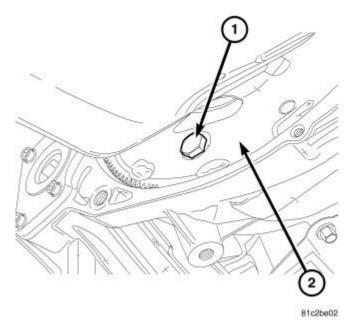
Torque Converter To Flex Plate Bolts Courtesy of CHRYSLER LLC
